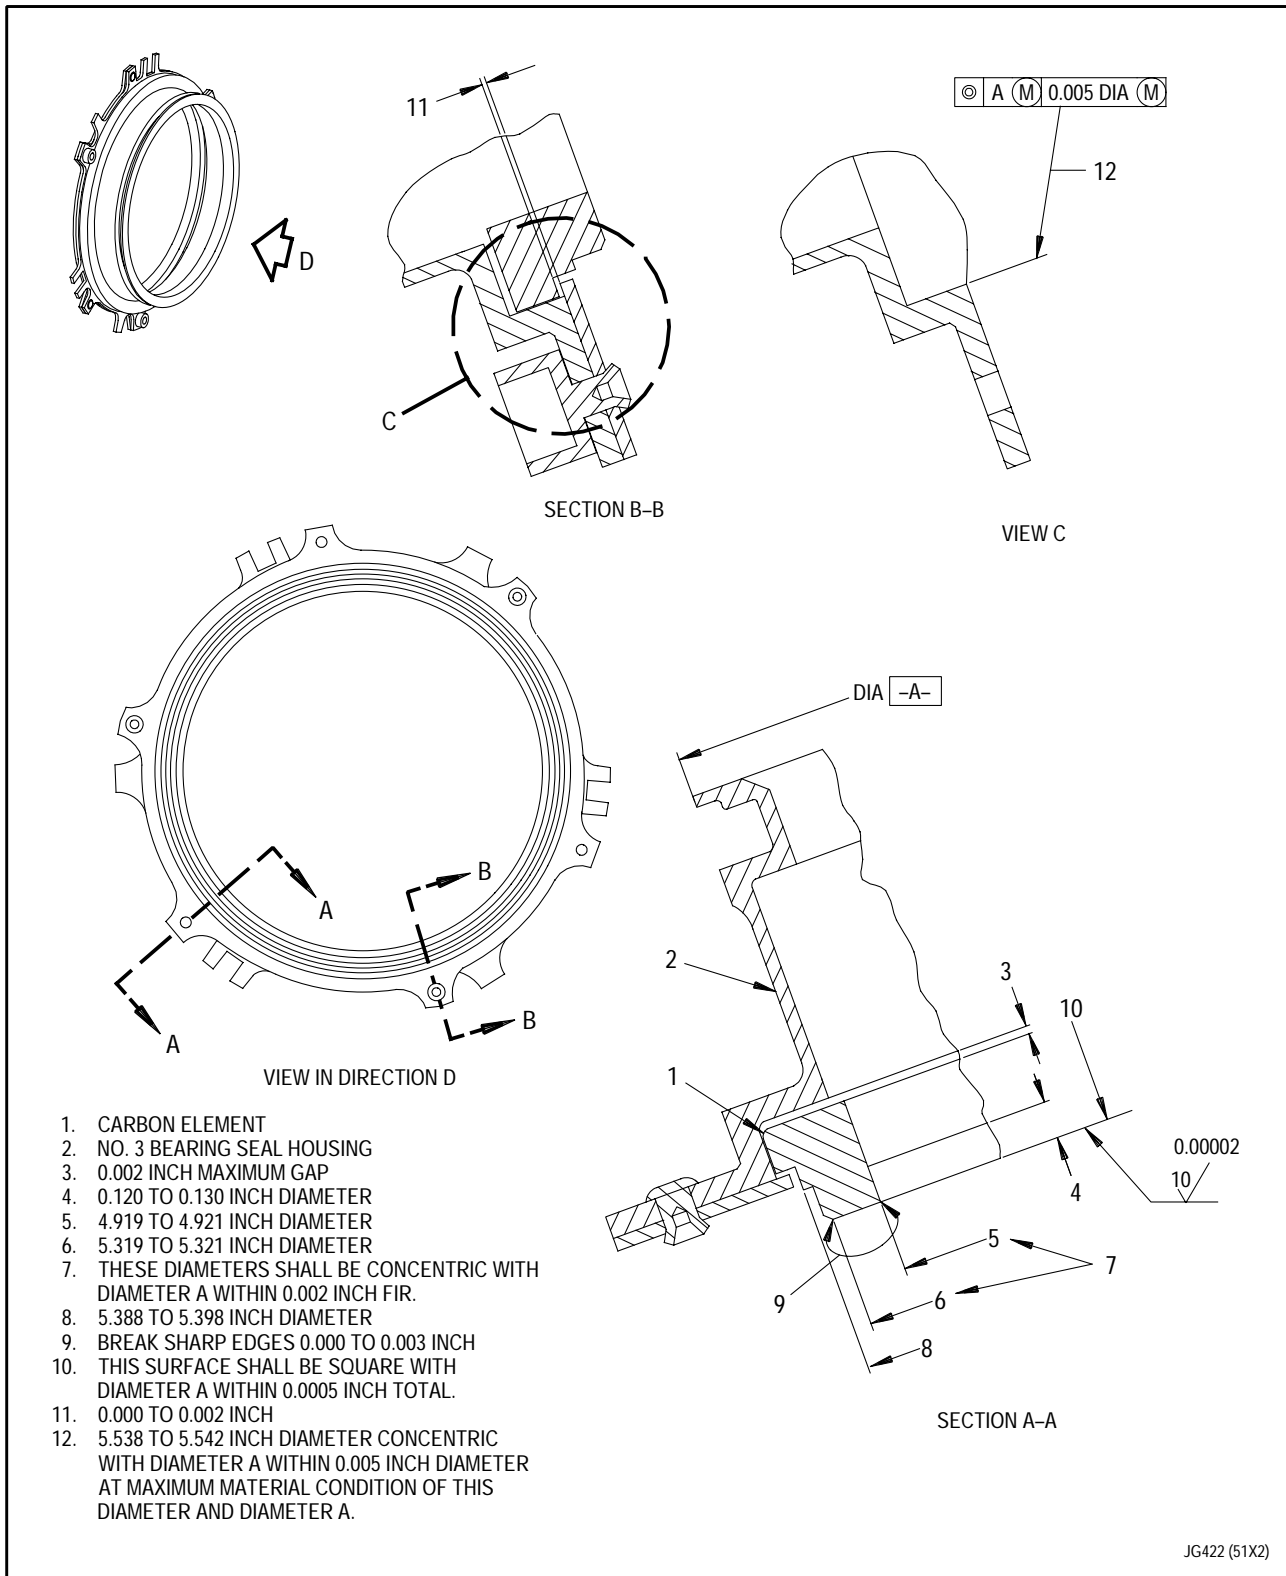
No. 3 Bearing Front Face Seal - Carbon Element Replacement
